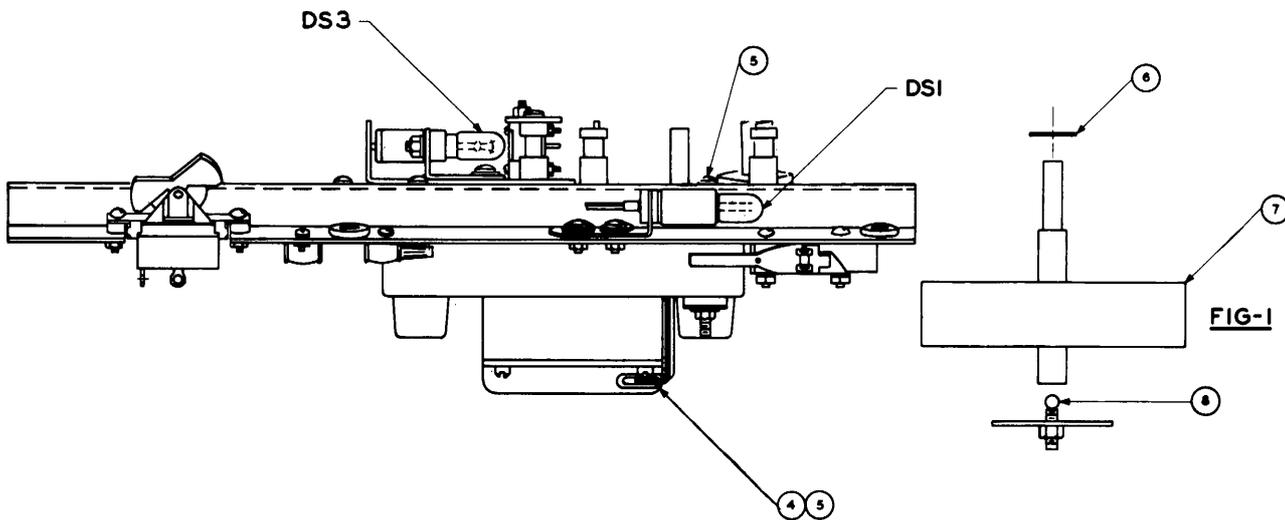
Motorboard wiring assembly, WW-5799-1D (part of final assembly, figure 1).
